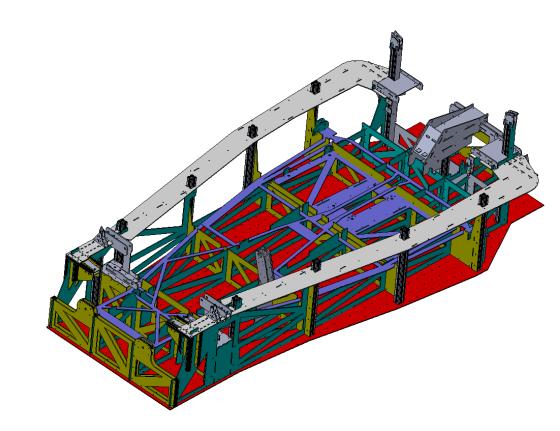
Total picture of measuring jig with the chassis mounted in.
